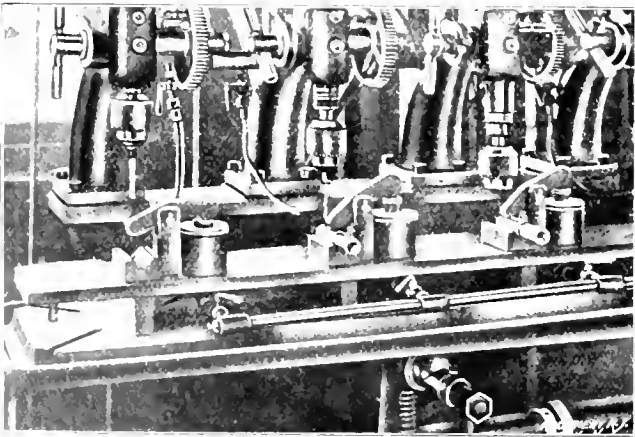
Multiple Spindle Drill Press with Pneumatic Clamps
